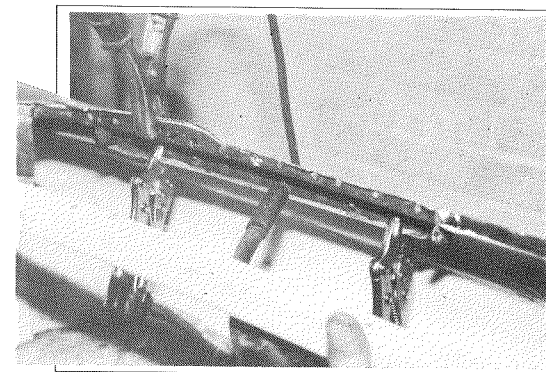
Carrying on with the rebuild, the wing top was itself plug welded to the forward spur of the rear deck: access being obtained by the previous removal of the strengthener panel shown in figure 43, after which the strengthener itself can be simply welded back in place.
